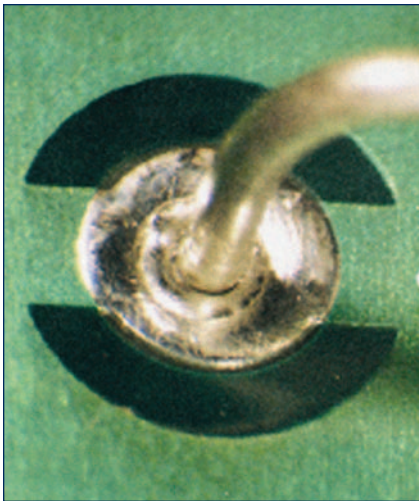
Examples of solder defects. Images courtesy of IPC.
